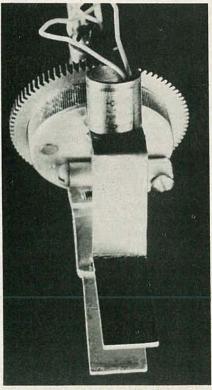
COMPLETED FINGER-TYPE end-effector. Gear is non-functional, but adds to appearance.
